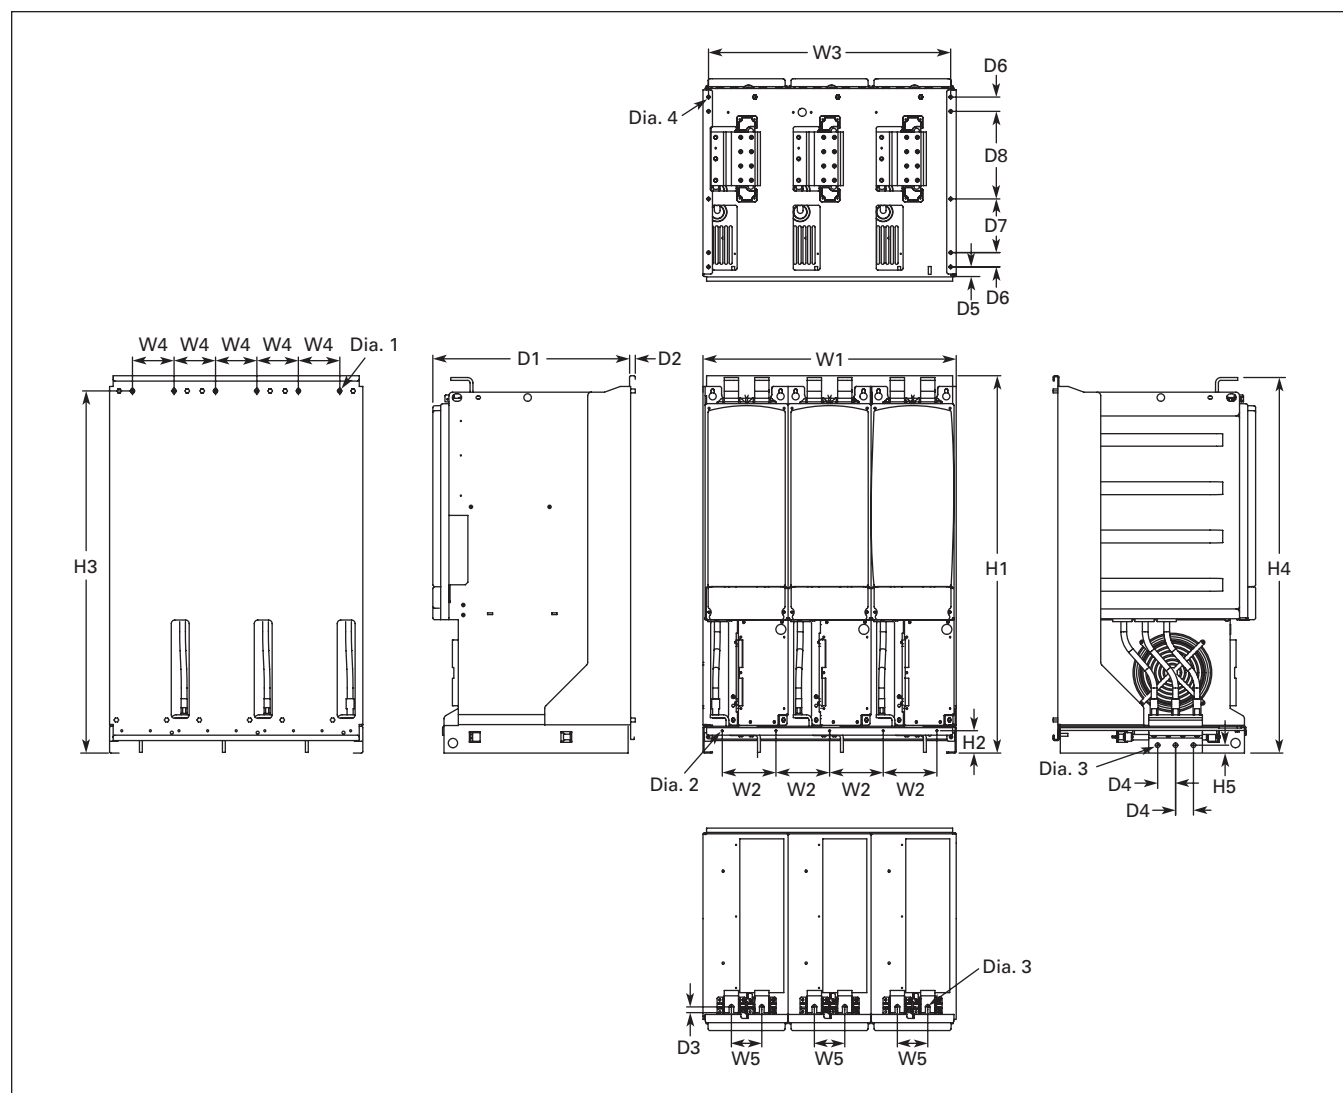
9000X Dimensions, FR13 Open Chassis Inverter
